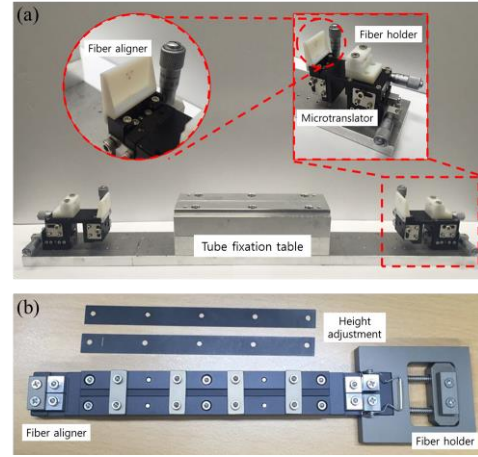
Fabrication of FBG sensors and alignment jig fixtures (a) and (b).
